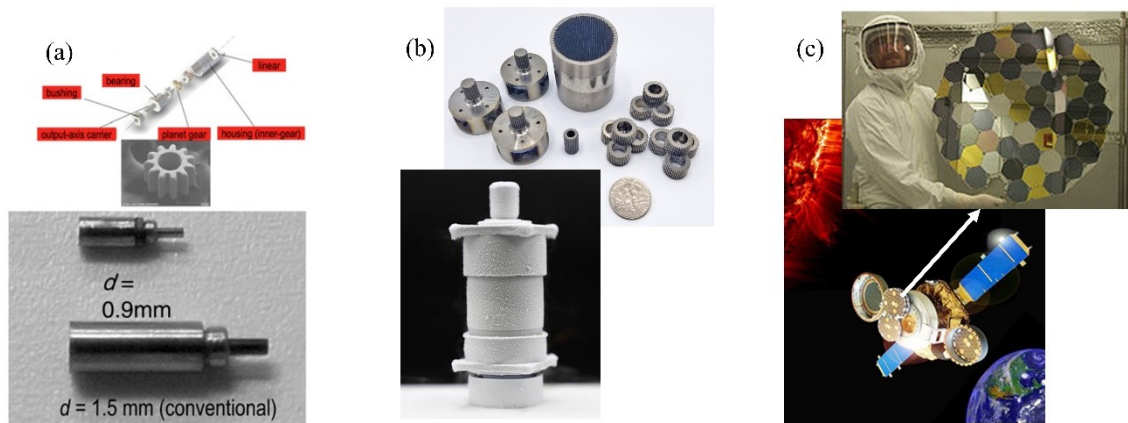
Applications of BMG: (a) assembly of the smallest reported motor [1.38], (b) assembly and components of cryo-capable gearbox [1.39], (c) BMG tiles installed on a sample-return probe [1.40].
